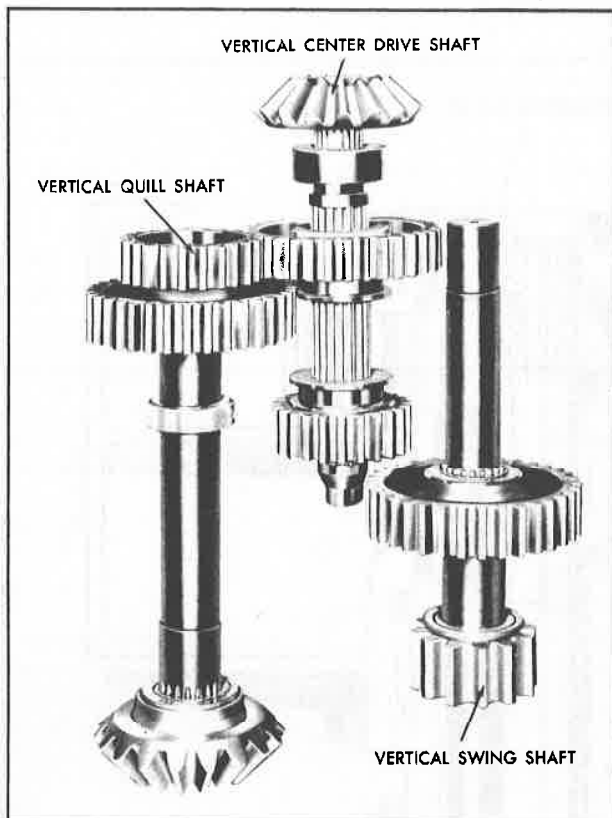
VERTICAL SHAFT ASSEMBLIES
